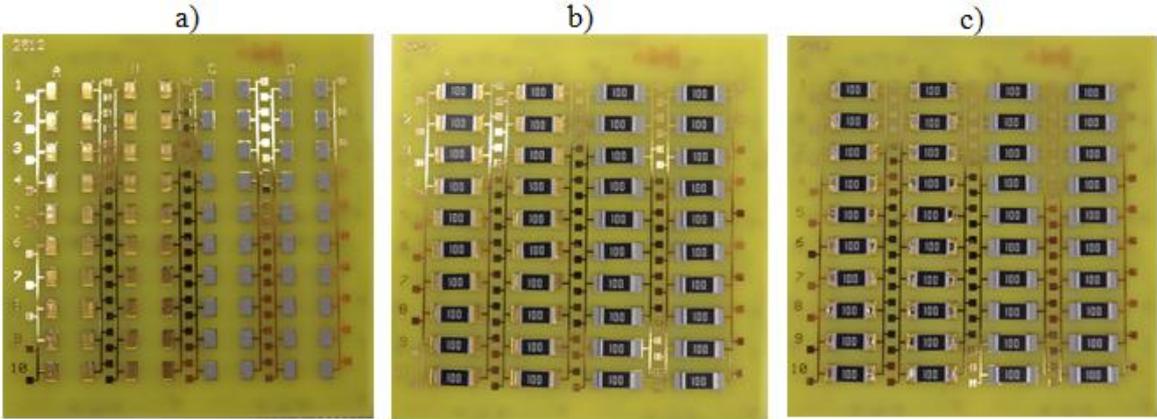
Process of manufactory of solder joint with solder preforms: a) Printed flux and solder paste through the stencil b) Mounted SMD 2512 components to flux and solder paste c) Added solder preforms to flux and SMD 2512 components [4]
